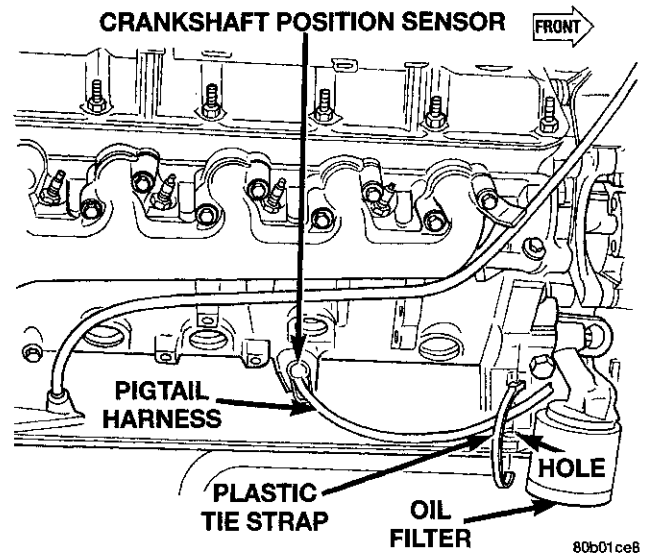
Crankshaft Position Sensor Location—8.0L V-10 Engine
